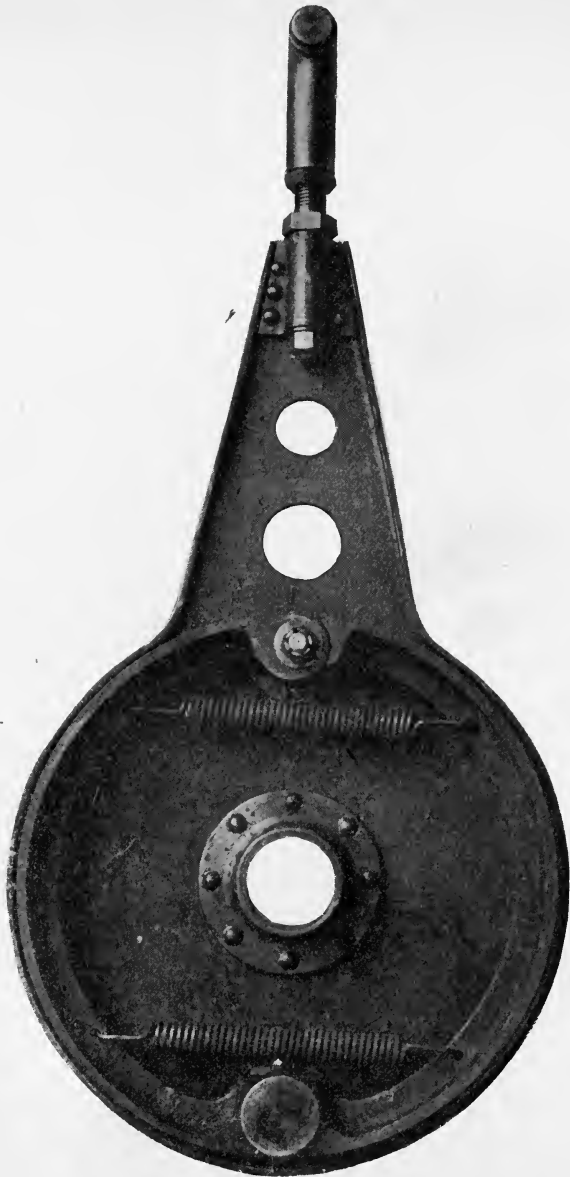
Radius Rod combined with Brake Drum for Chain-driven Car.
